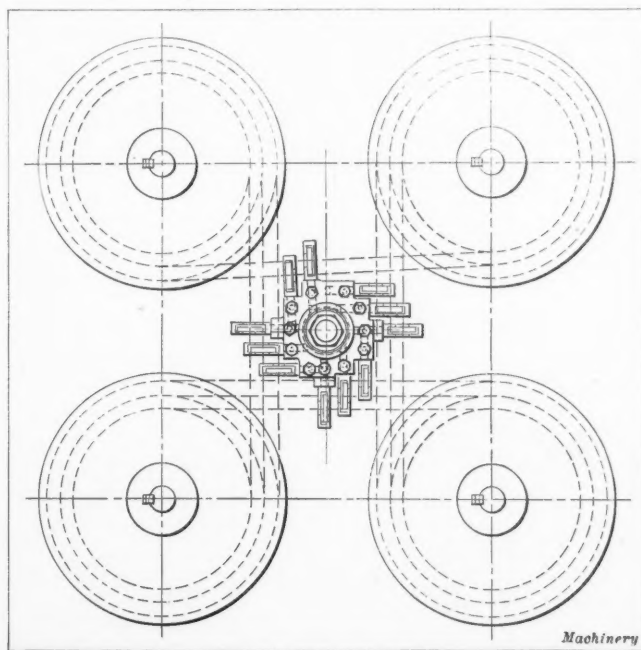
Plan View of the Werths Multiple Wire-drawing Machine
